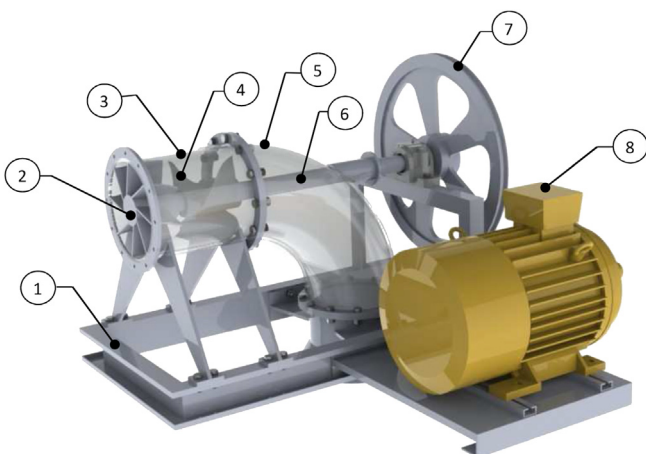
Assembling of propeller turbine. 1–Support, 2–Guide vanes, 3–Casing, 4–Runner, 5–Draft tube, 6–Shaft, 7– Transmit power system, 8–Generator.
